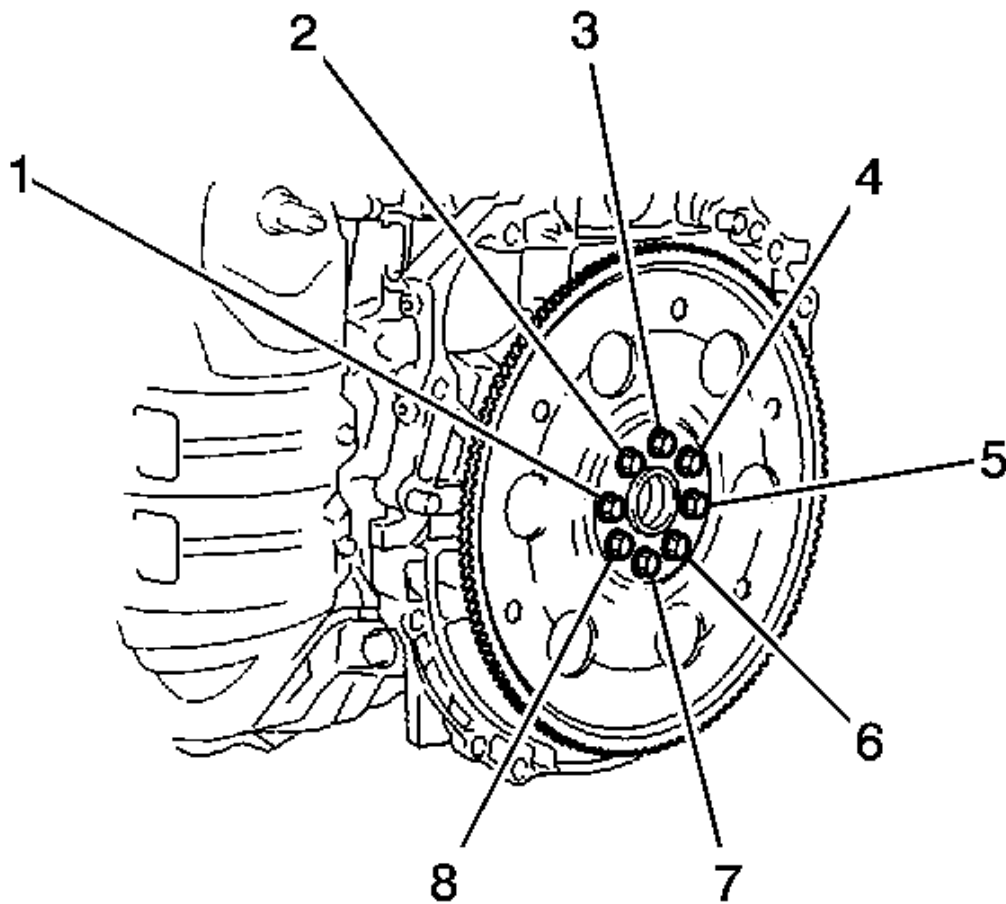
Identifying Rear Drive Plate Spacer Bolts
